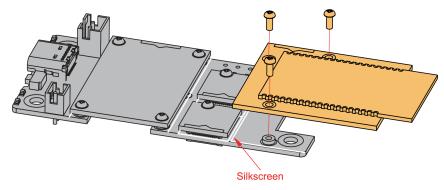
WisBlock IO silkscreen on the RAK19007 Base Board
